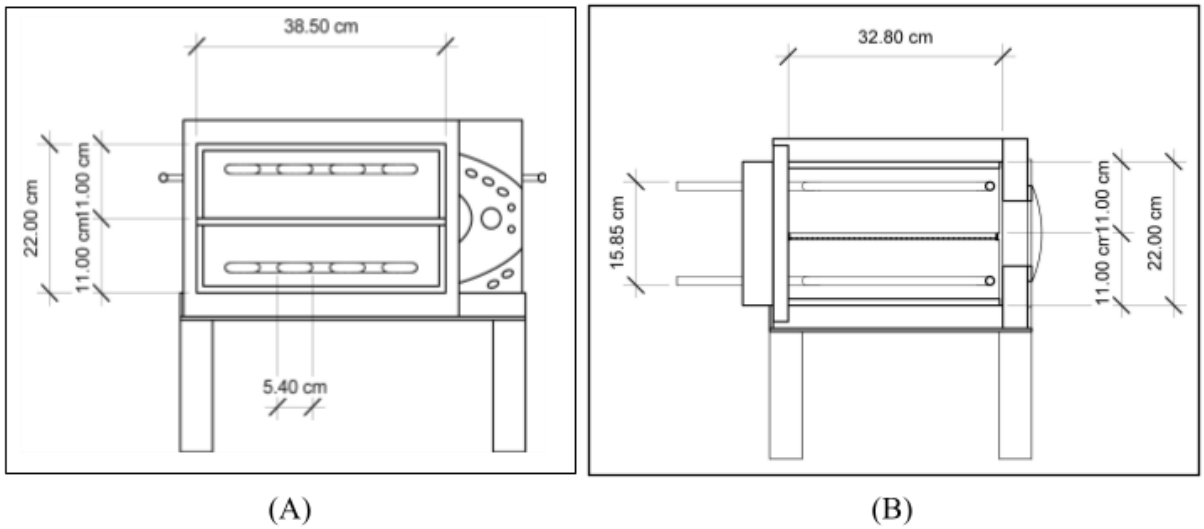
(A) Front view section of the proposed coffee bean dryer, (B) Left side view section of the proposed coffee bean dryer
